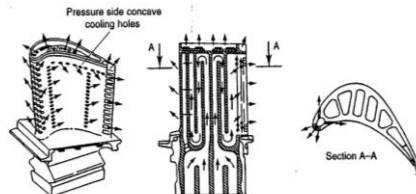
Cooled turbine rotor blade [courtesy General Electric]
